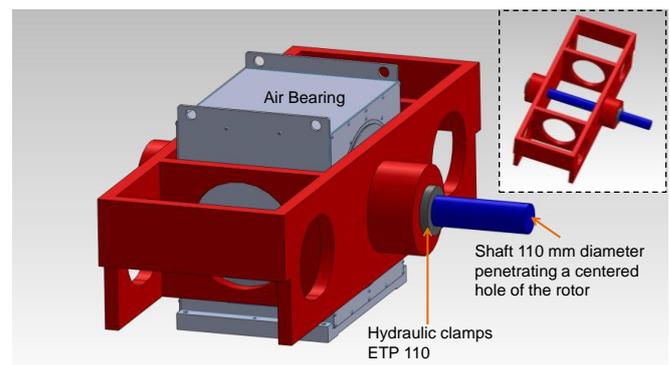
New assembling technique for installation of the torque arm on the air-bearing provided by CEH. The inset clearly shows that the rotor of the air-bearing is not in the path of torque delivery.
